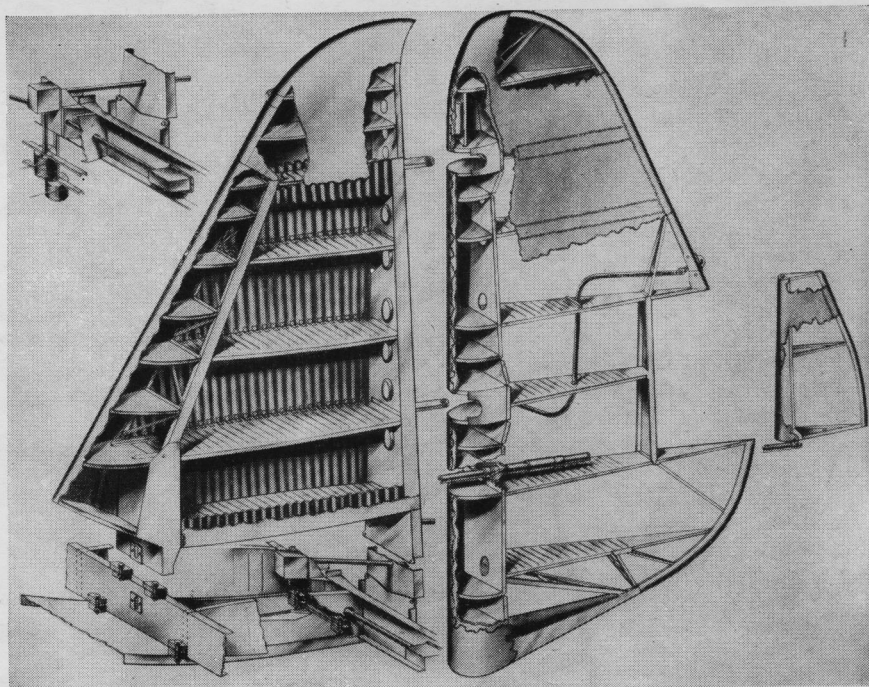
The fin and rudder construction is similar to the stabilizer and elevator. The fin is reinforced with corrugated inside skin.
